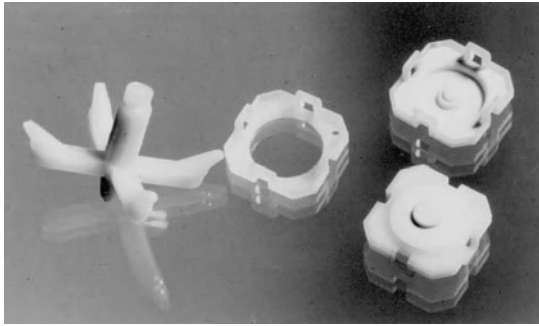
Microswitch covers produced in a 2 × 16-cavity mold
